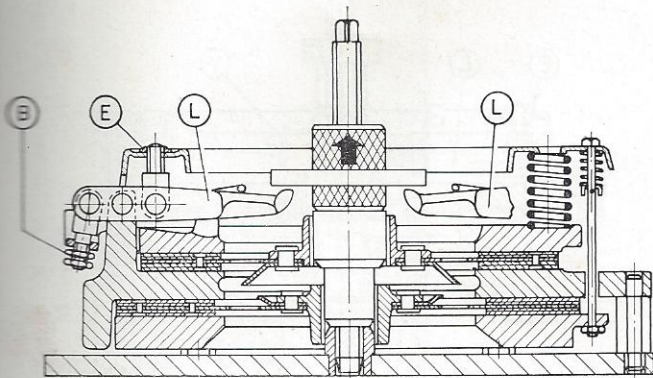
Disassembly and reassembly of the clutch on fixture A 417163.
